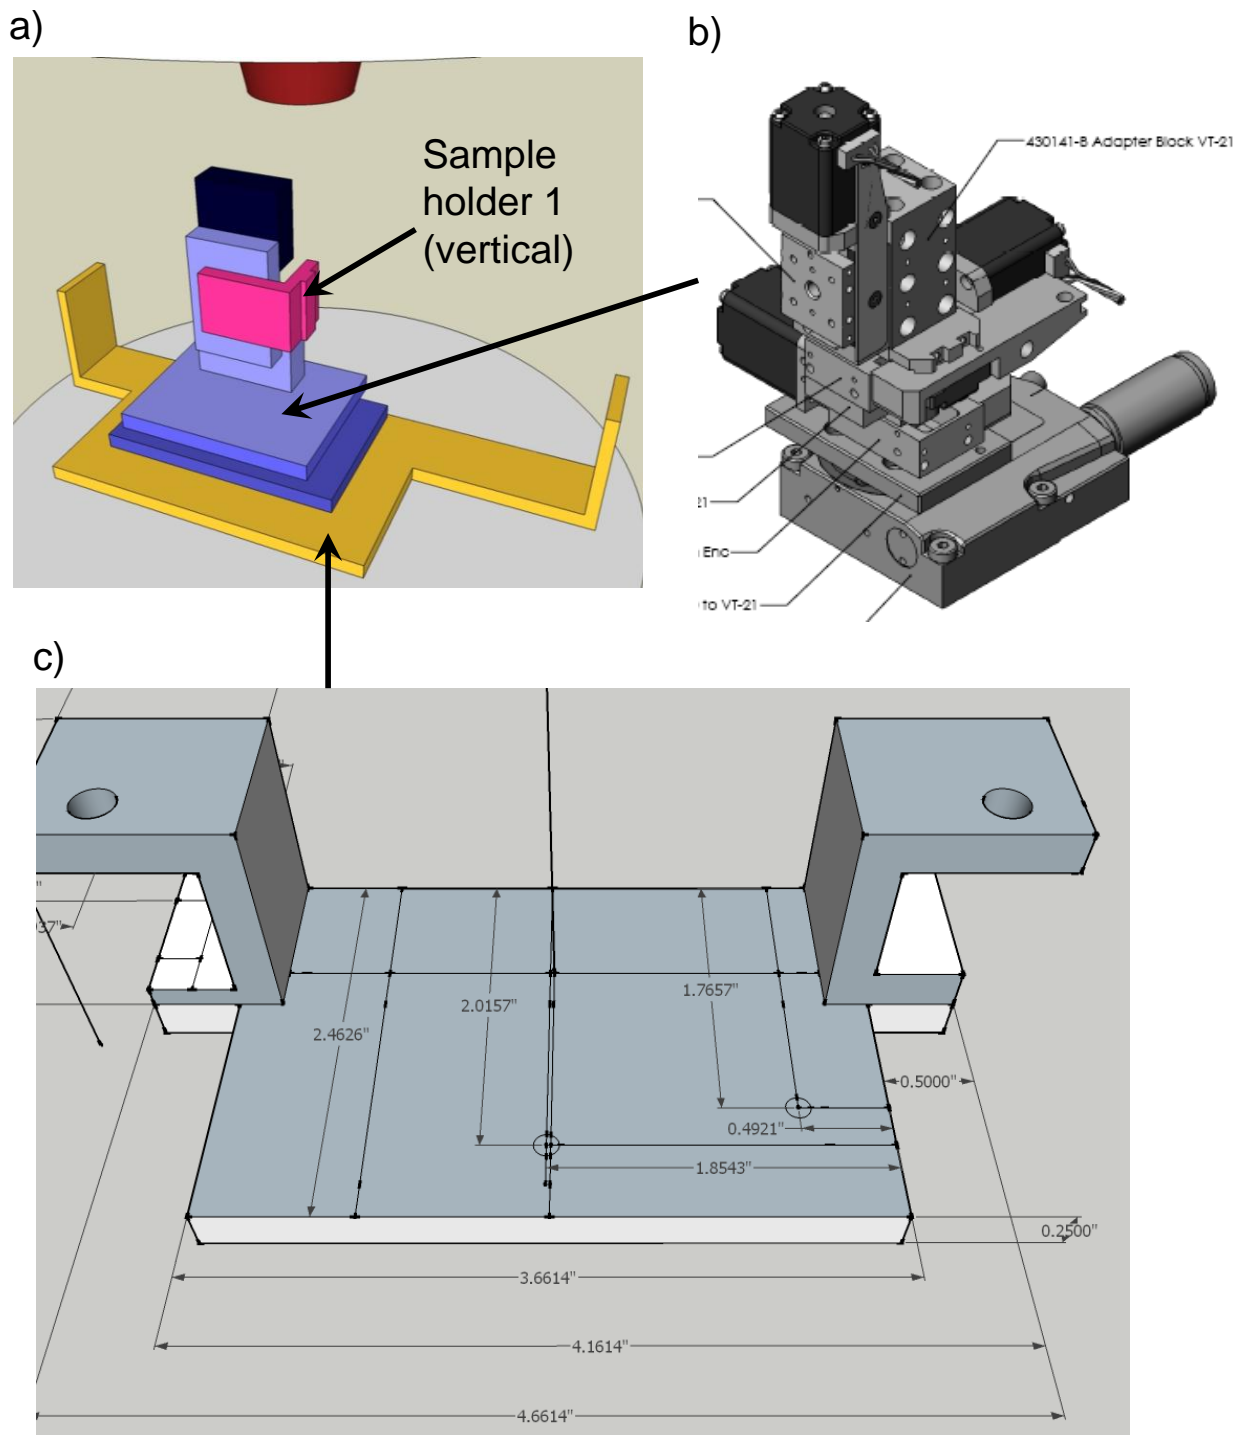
a) Schematic of sample holder, stage, and carrier boat assembly inside vacuum chamber. b) CAD drawing of X-Y-Z stage (VT-21 10mm RS-40) from MicosUSA [63]. c) Machine drawing of carrier boat to secure the stage in chamber.
